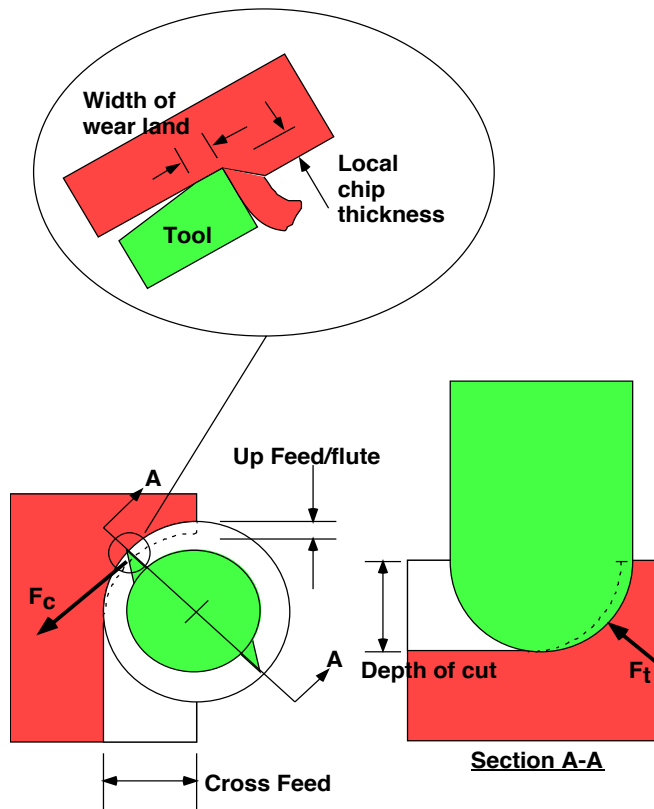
Sketch of chip geometry and tool forces in a ball end milling process.
